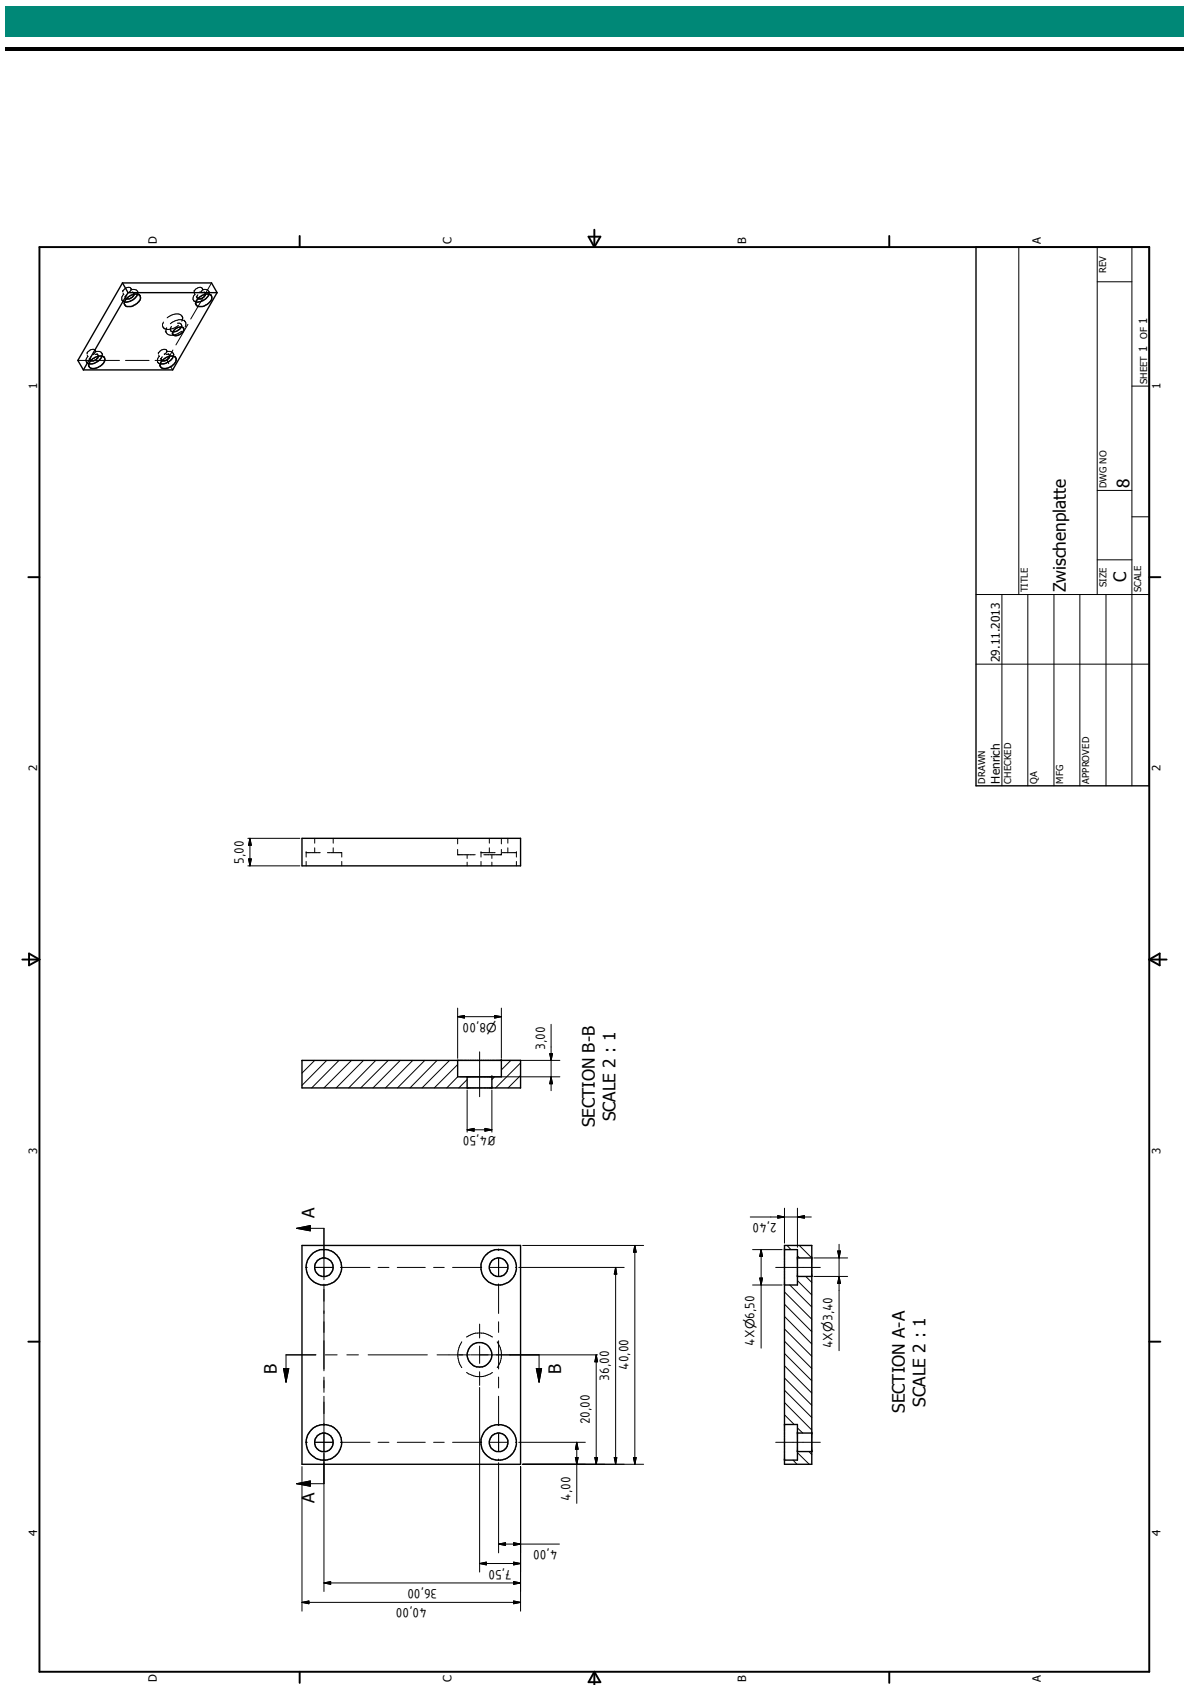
Technical drawing of the adapter plate for the mirror mount.
